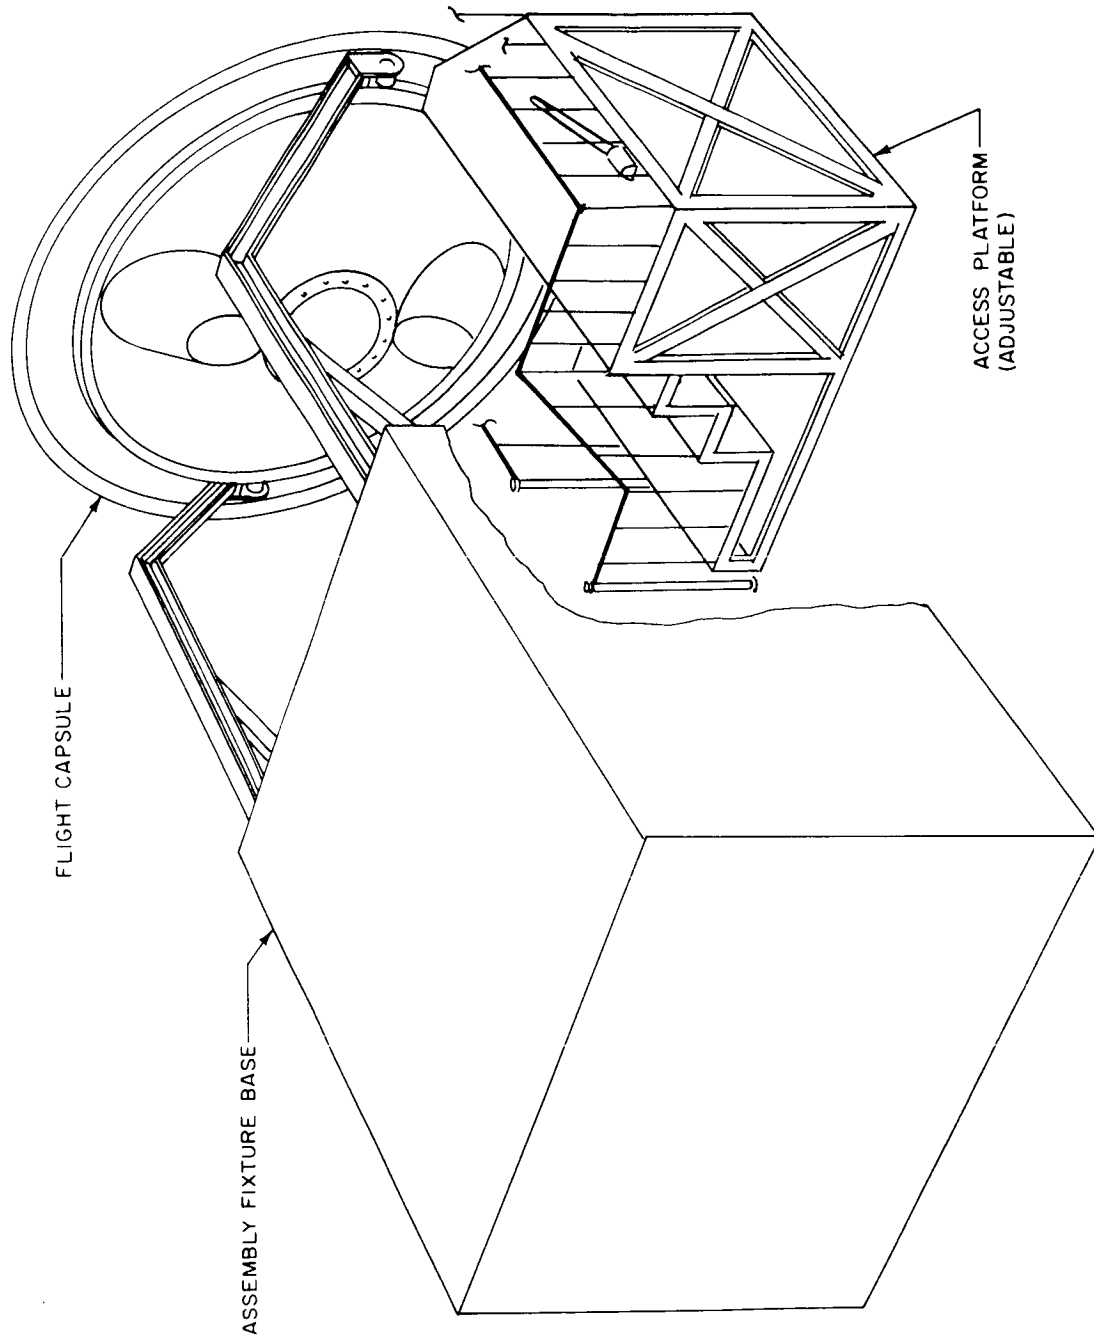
MAJOR ASSEMBLY FIXTURE AND STAND
